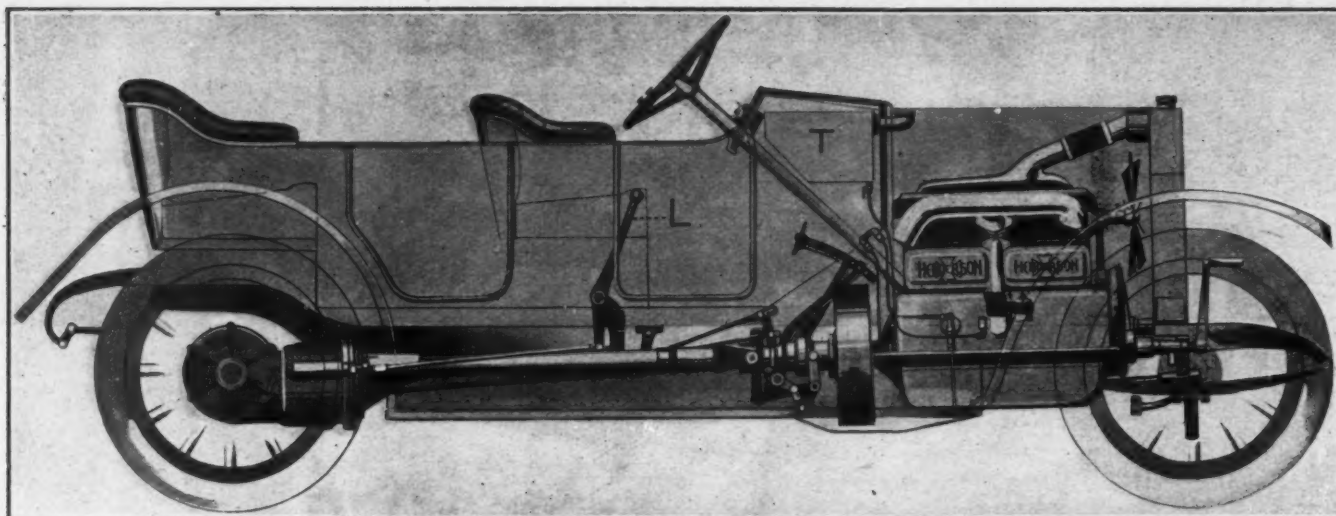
X-ray view of the new Henderson touring car, showing location of tank and filler pipe
